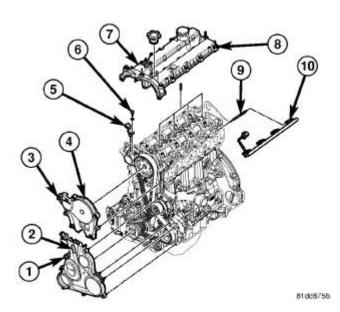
Upper Front Timing Belt Cover & Cylinder Head Cover
